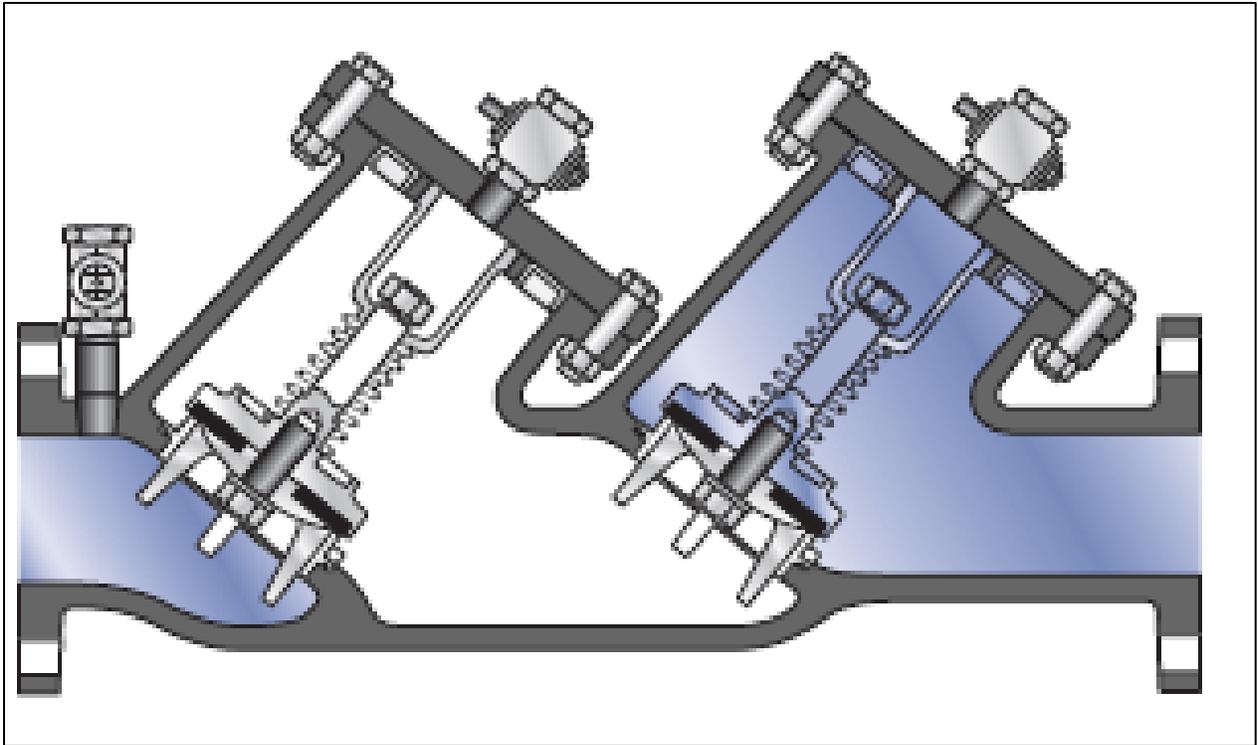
Double check valve assembly (DCVA) (from EPA-CCCM).
